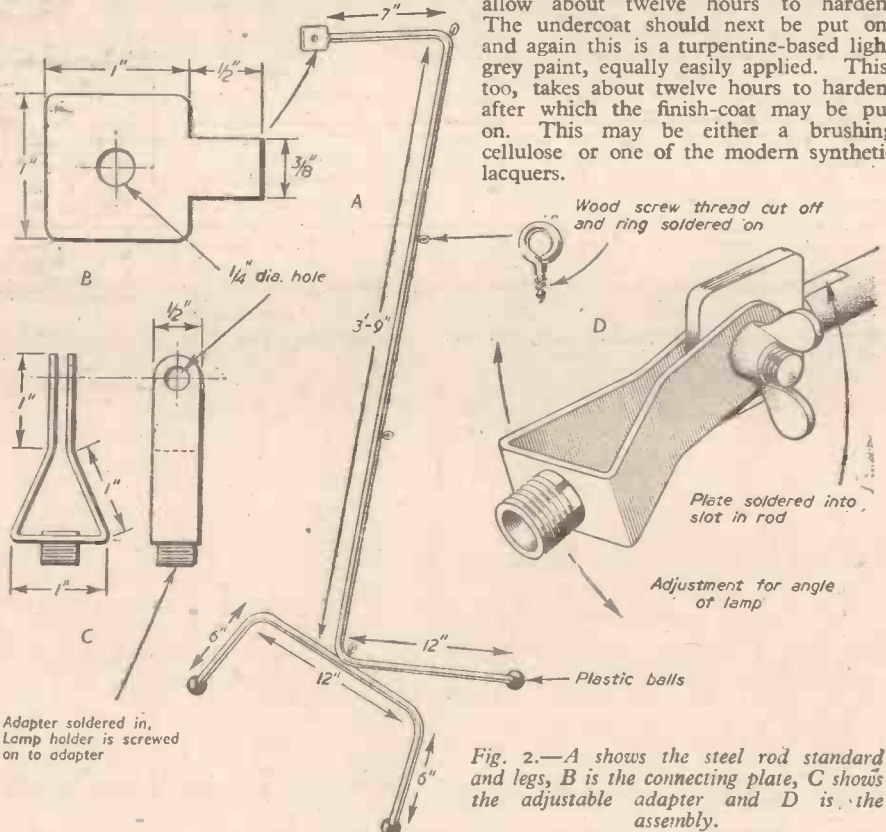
A shows the steel rod standard and legs, B is the connecting plate, C shows the adjustable adapter and D is the assembly.
